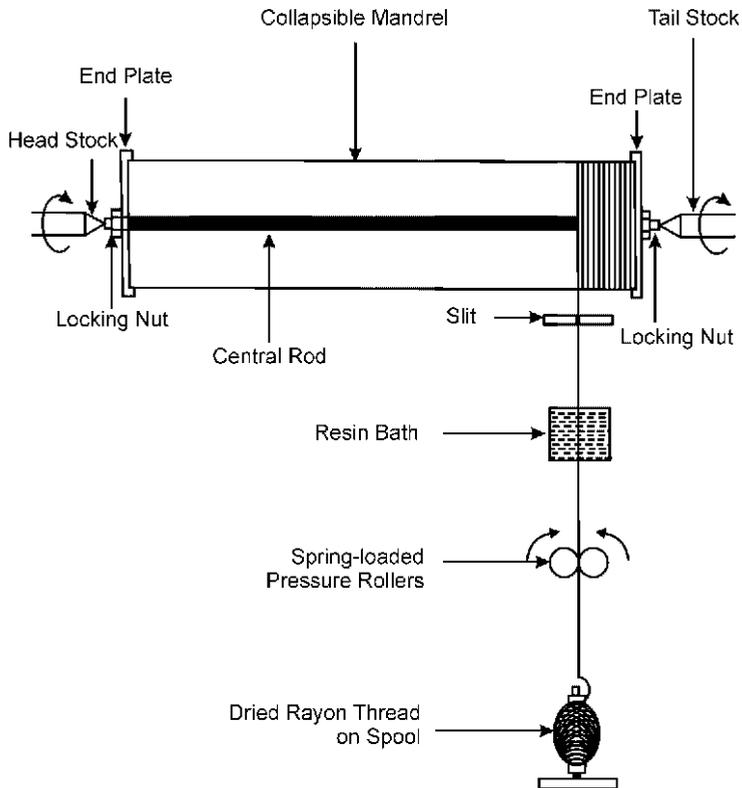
Assembly for fabrication of inhibitor sleeve.
